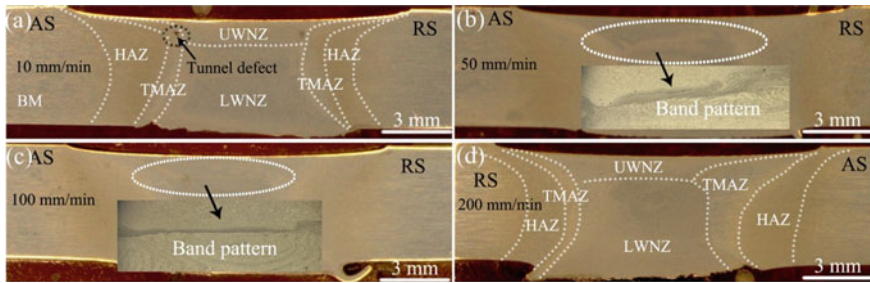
The cross-sections of SSFSW₁ joints welded for different welding speeds: a 10 mm/min, b 50 mm/min, c 100 mm/min, and d 200 mm/min [72]
